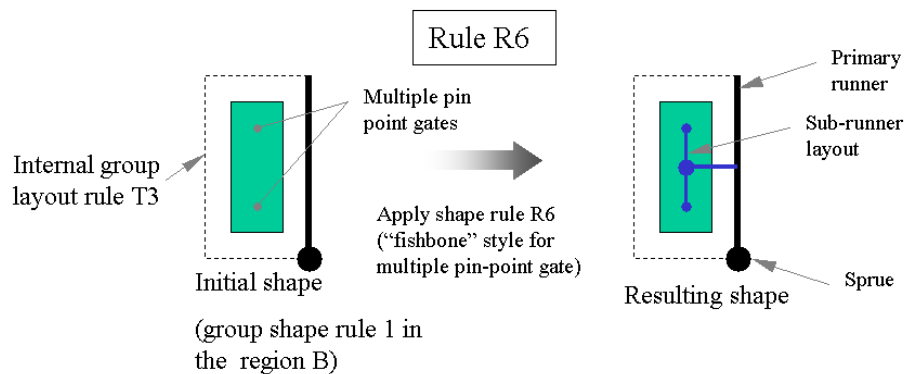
Example of an SG rule of cold runner layout design for multiple pin-point gates on a moulding part
